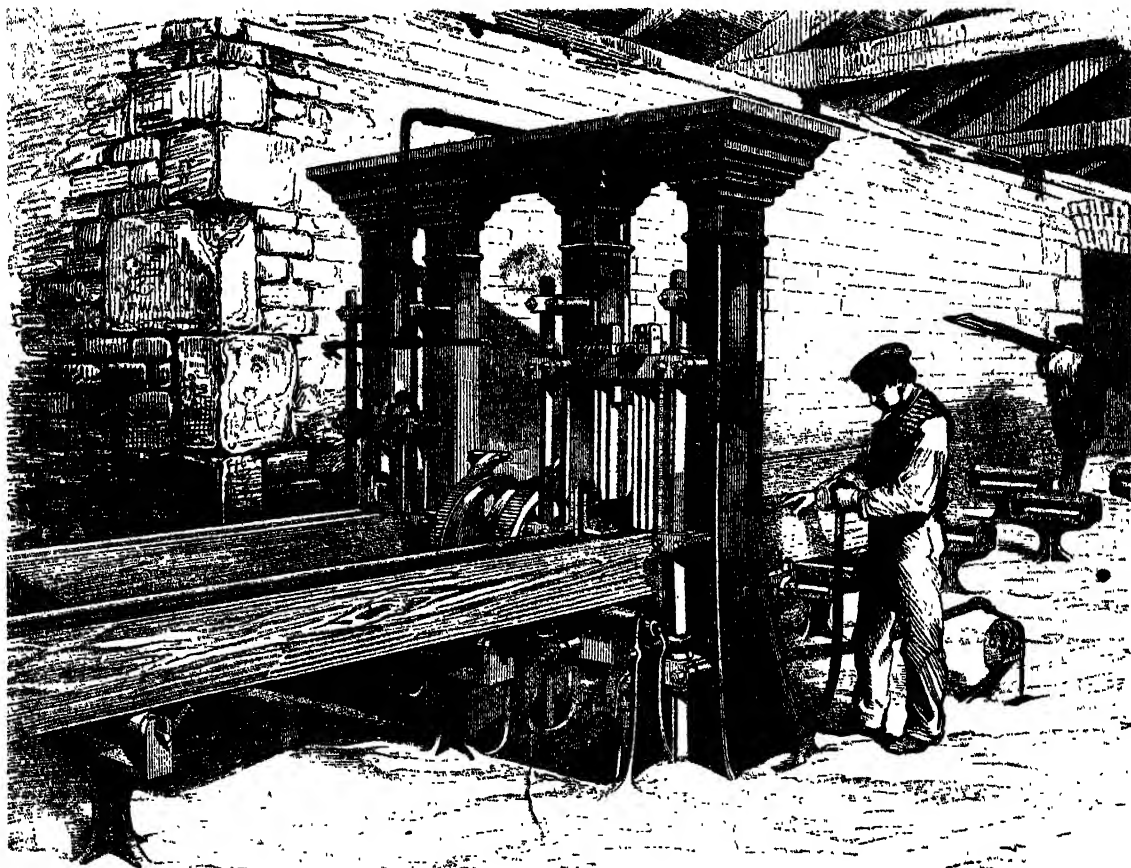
FRAME DEAL-SAWING MACHINE.
